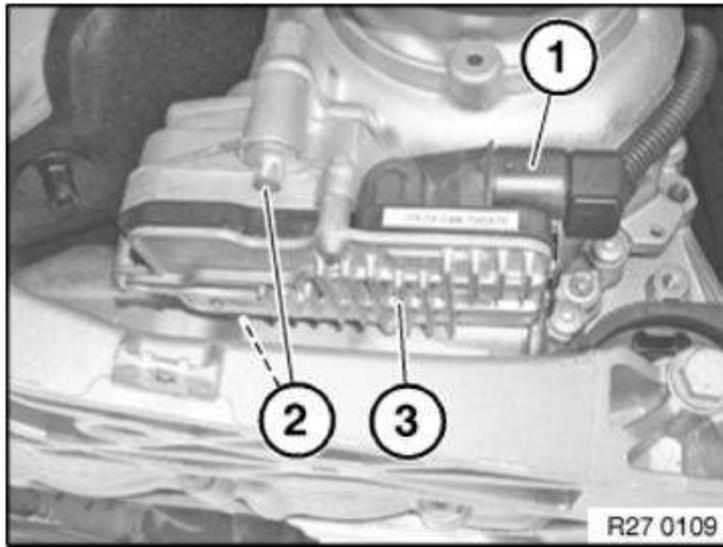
Identifying VTG Control Unit, Connector And Screws
